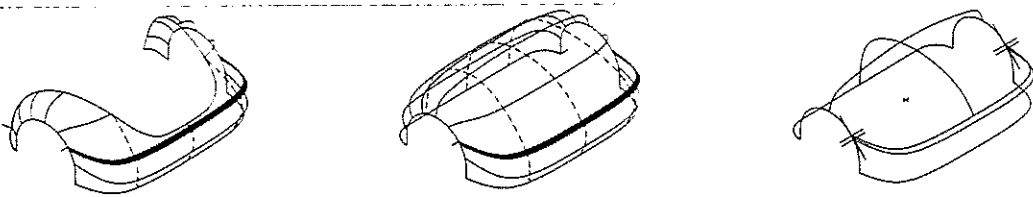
Trimmed surfaces, base surfaces, and wires for the front surfaces
